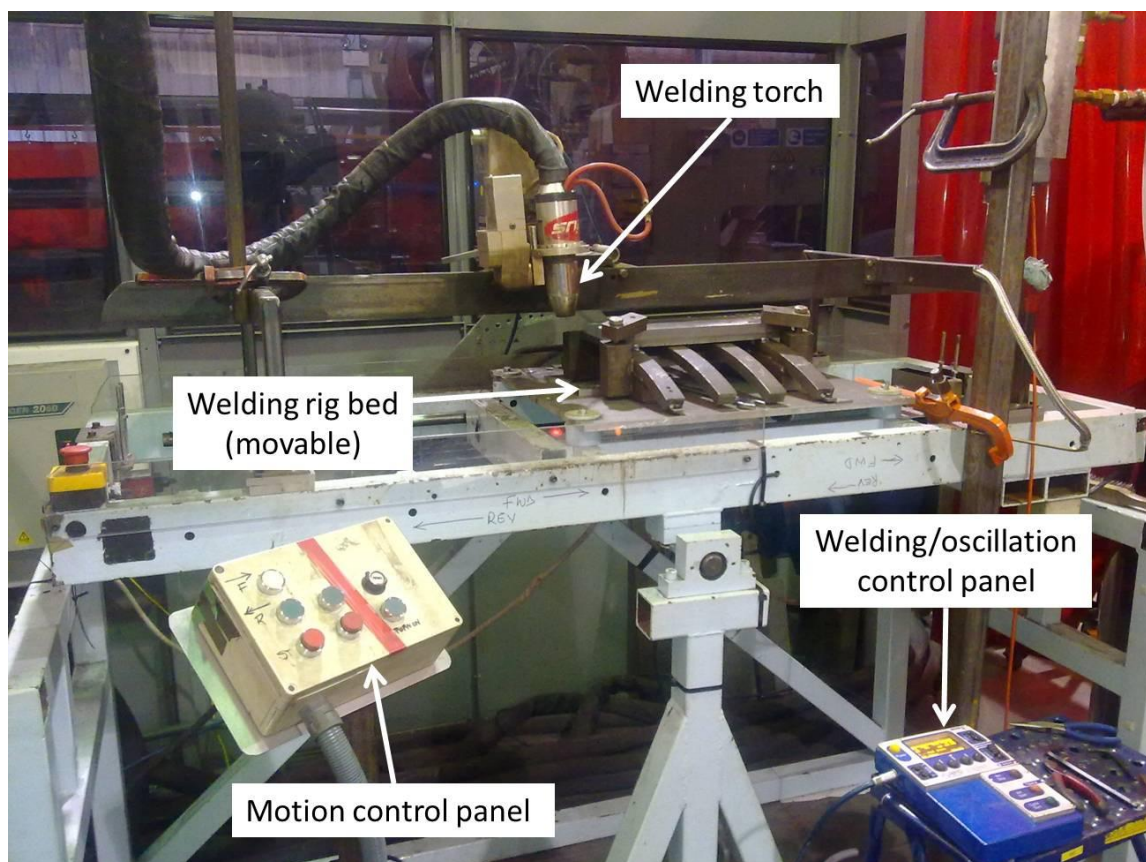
Linear welding rig with an RMS welding head oscillator
